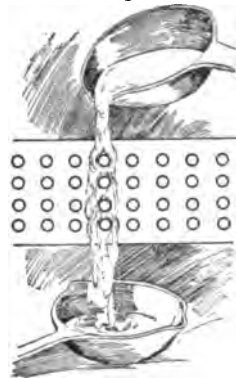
Illustrating how solder is poured over the leaky radiator tubes
